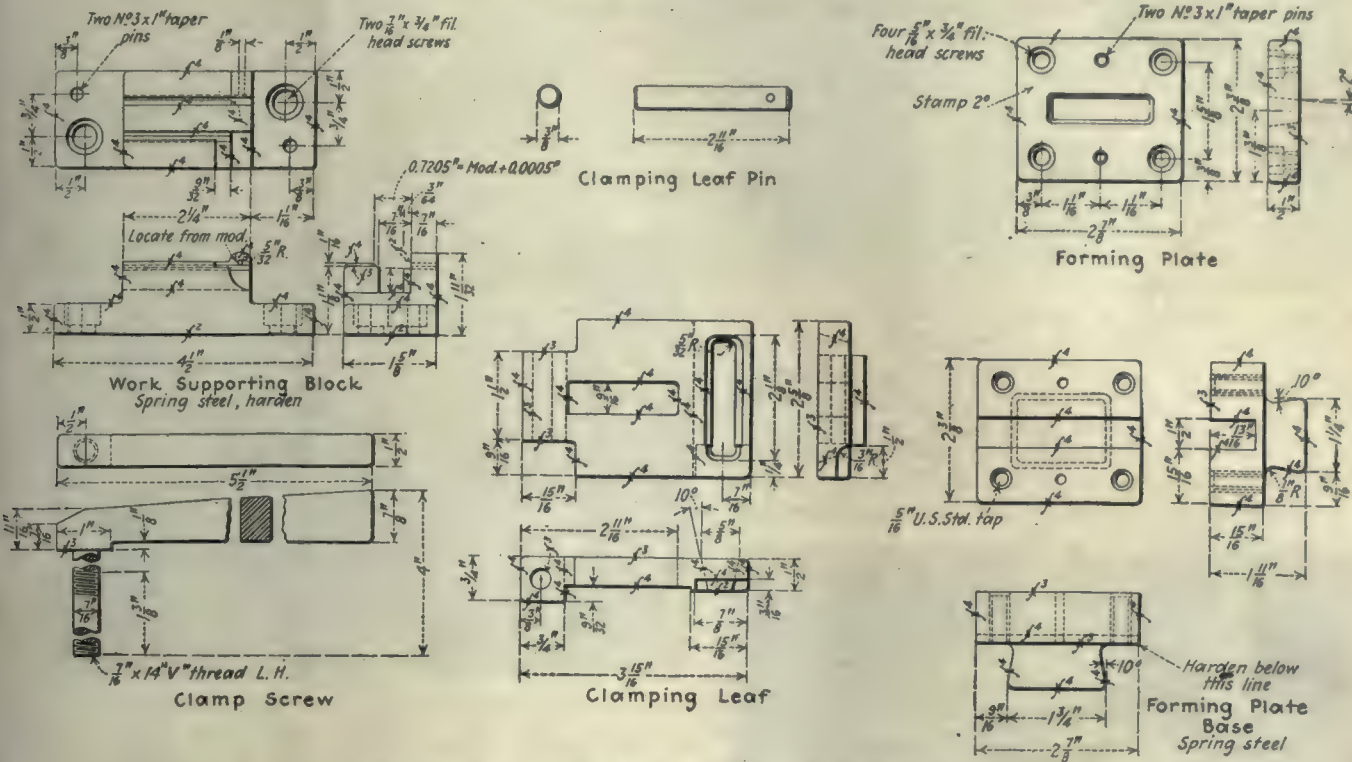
SOME DETAILS OF FIXTURE SHOWN IN FIG. 1
